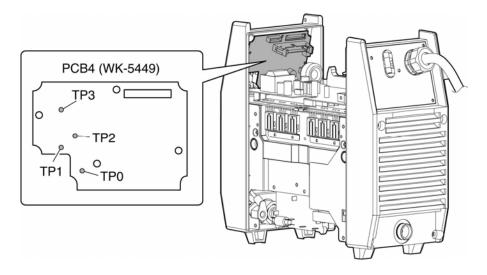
Checkpoints TPO-TP3 on PCB6
